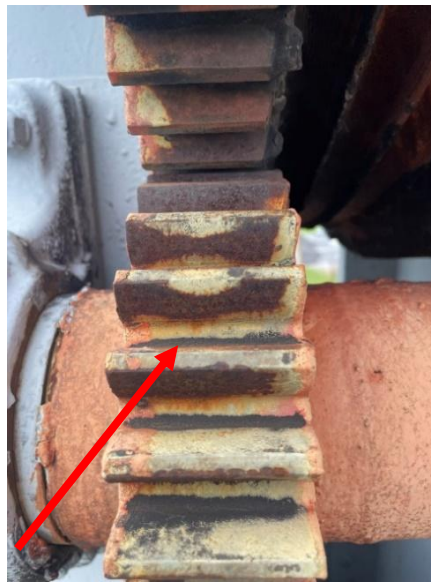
Corrosive wear on contacting faces of open gearing. Coded CS4 "severe" due to heavy corrosion defect.
